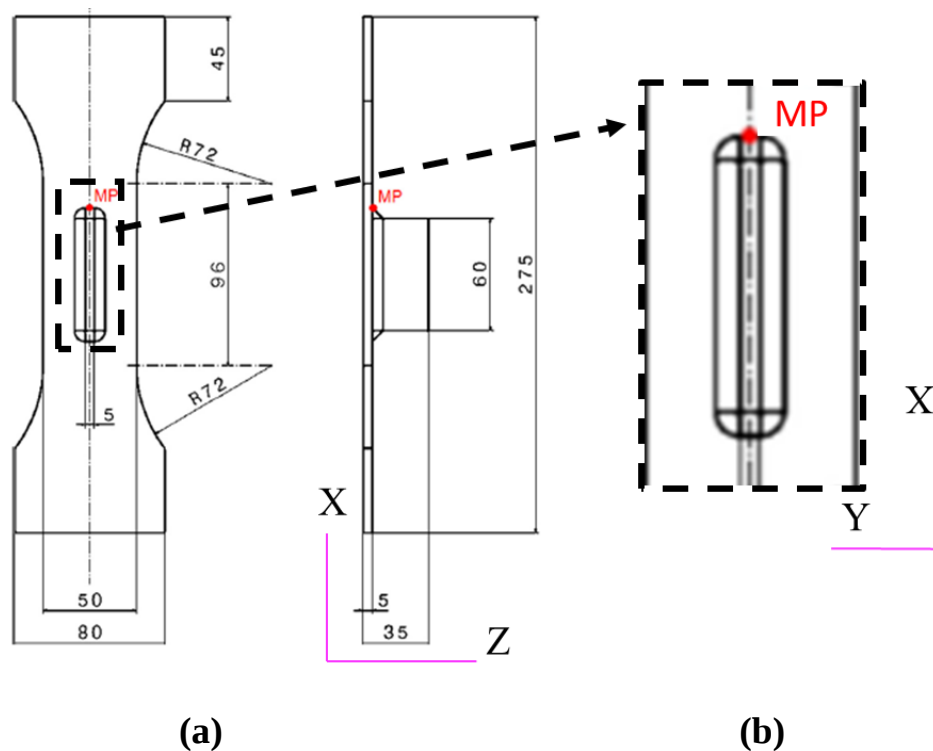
(a) geometry of target out-of-plane gusset welded joint, dimensions in mm. (b) target location 'MP' [66].
